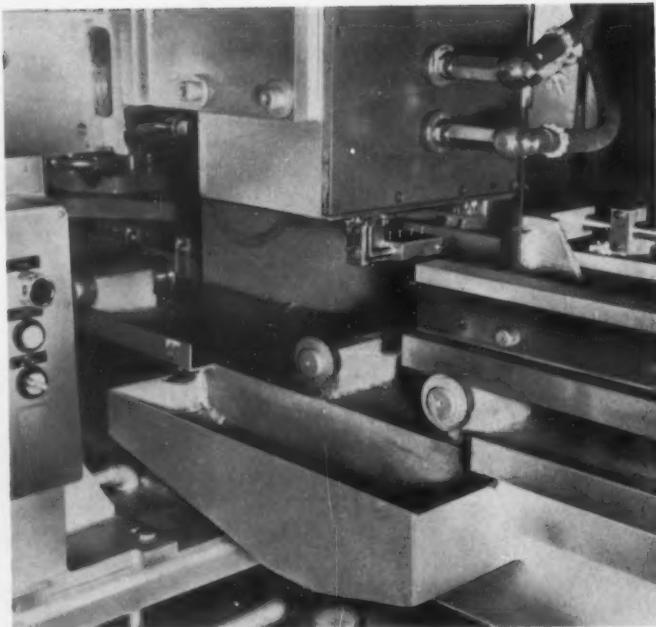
Intensifier for flat face hardening used on Natco-Delapena equipment for treating machine ways
